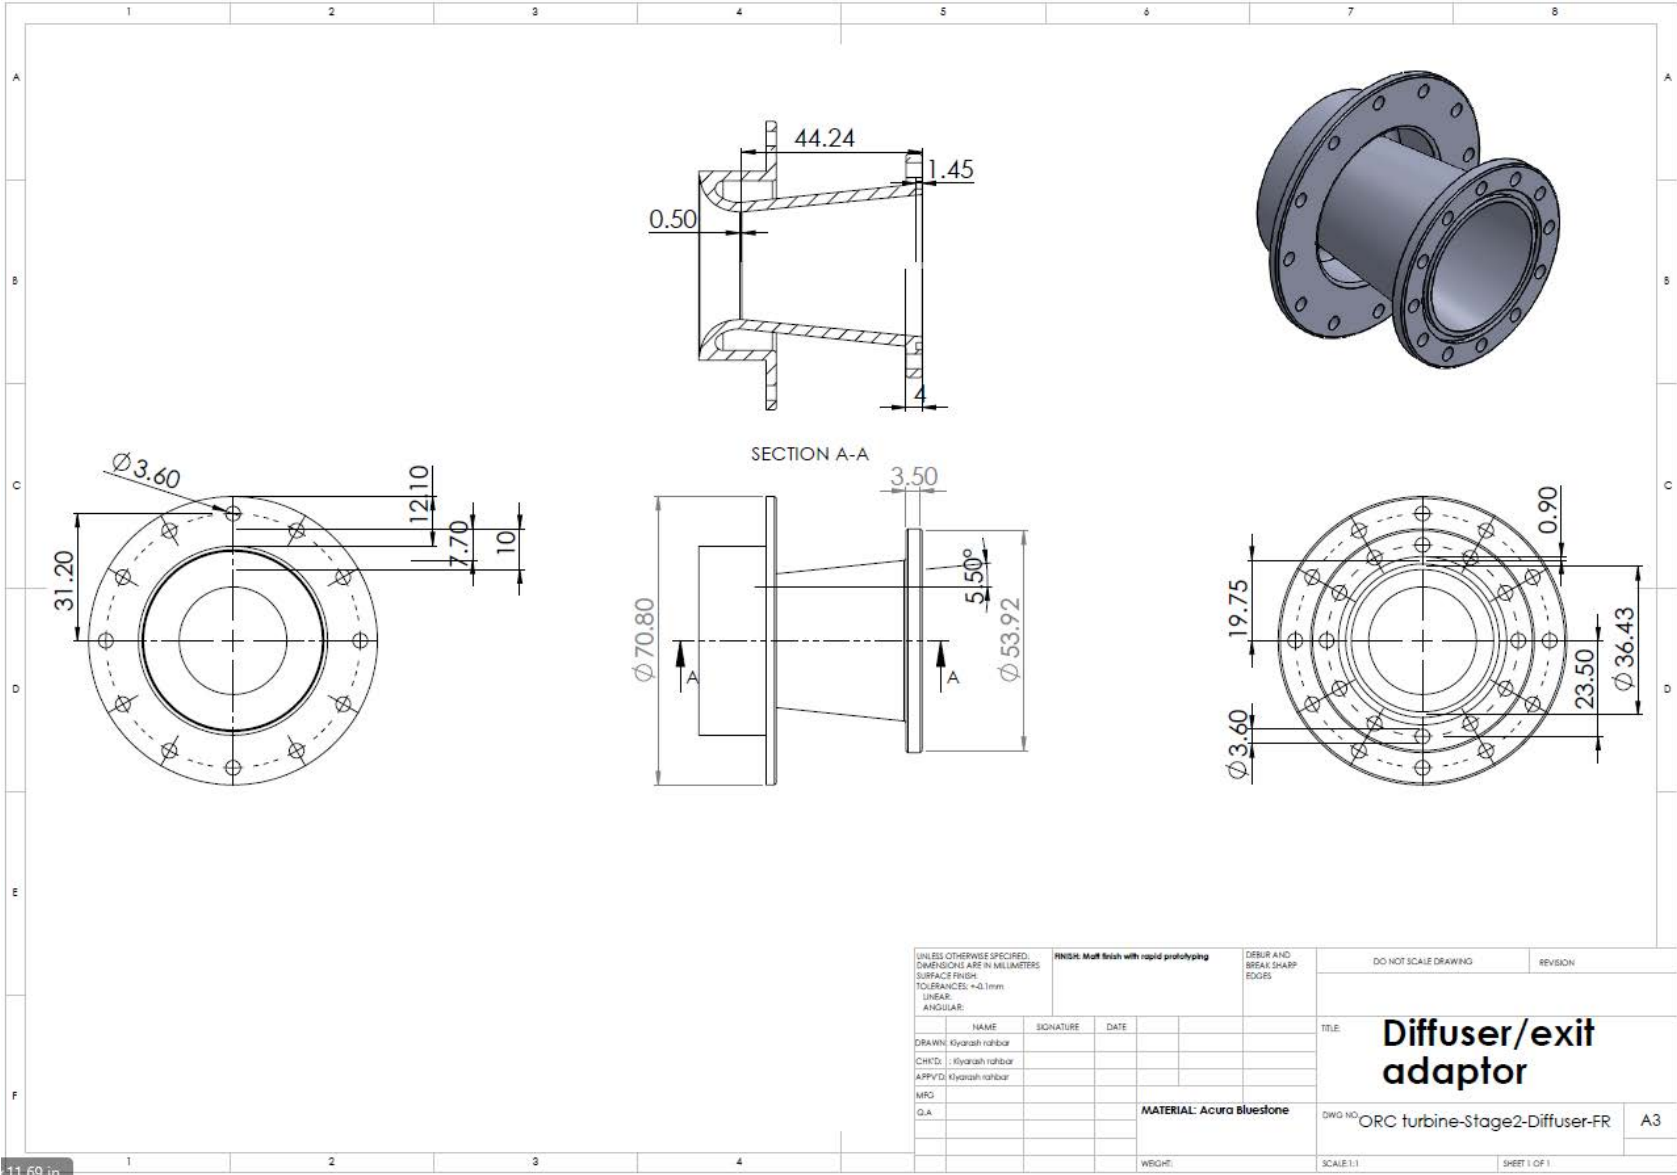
Diffuser/exit adaptor- detailed two-dimensional drawing
